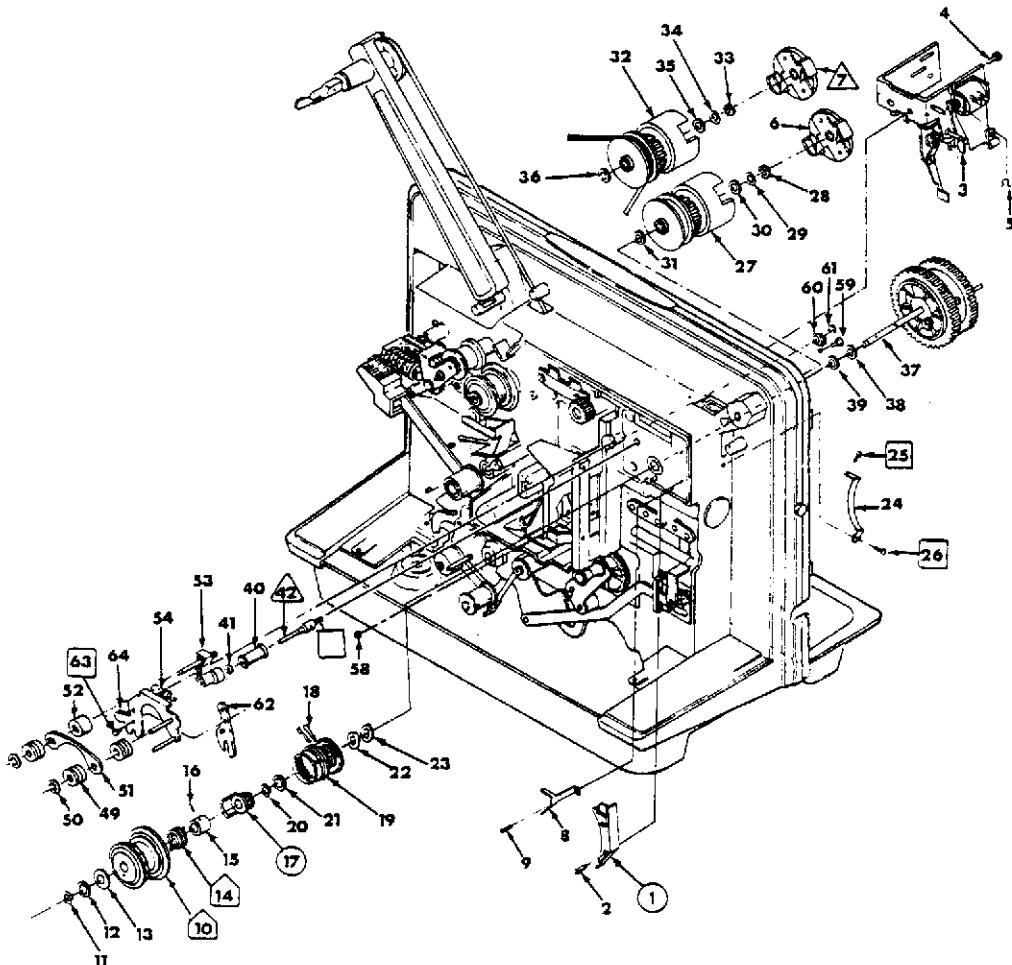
REMOVAL AND REASSEMBLY OF FRONT CLUTCHES
